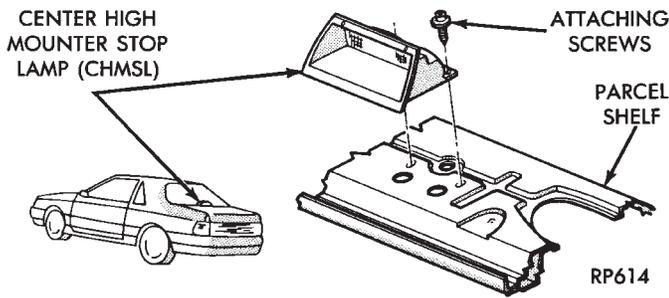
Center High Mounted Stop Lamp—AJ Body
